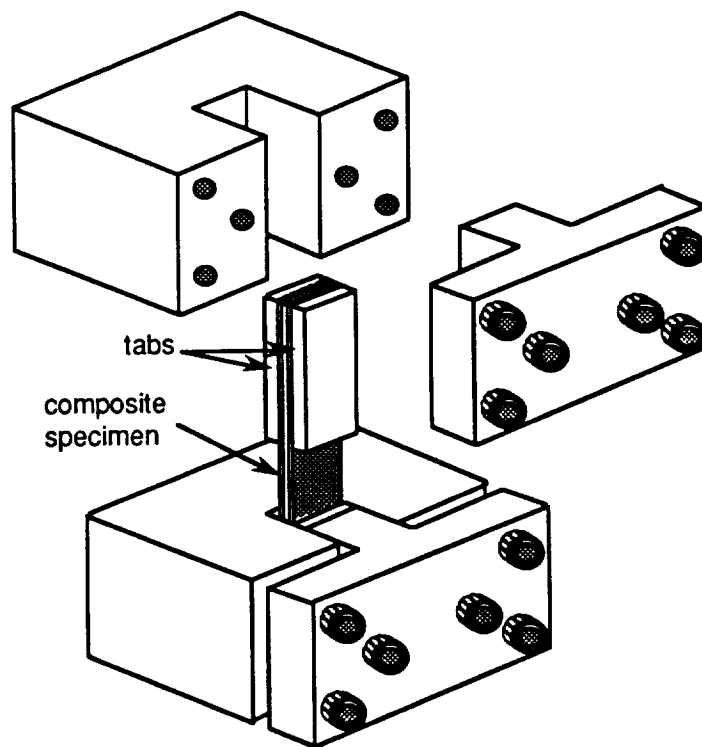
End loaded fixture for thick section composites, Camponeschi [2]
